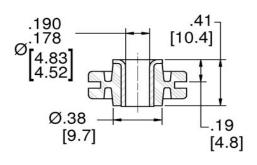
Part Dimensions - J-17736 Series (Without Ferrule)
